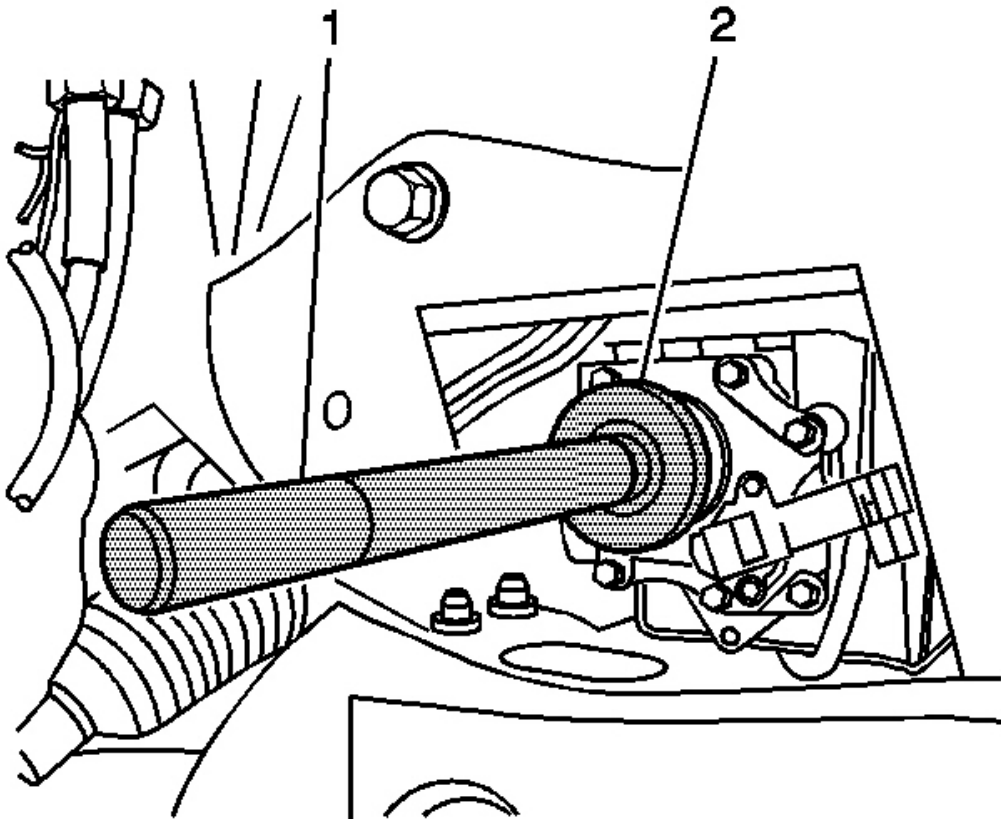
Installing Oil Seal Using Axle Seal Installer And Universal Driver Handle
